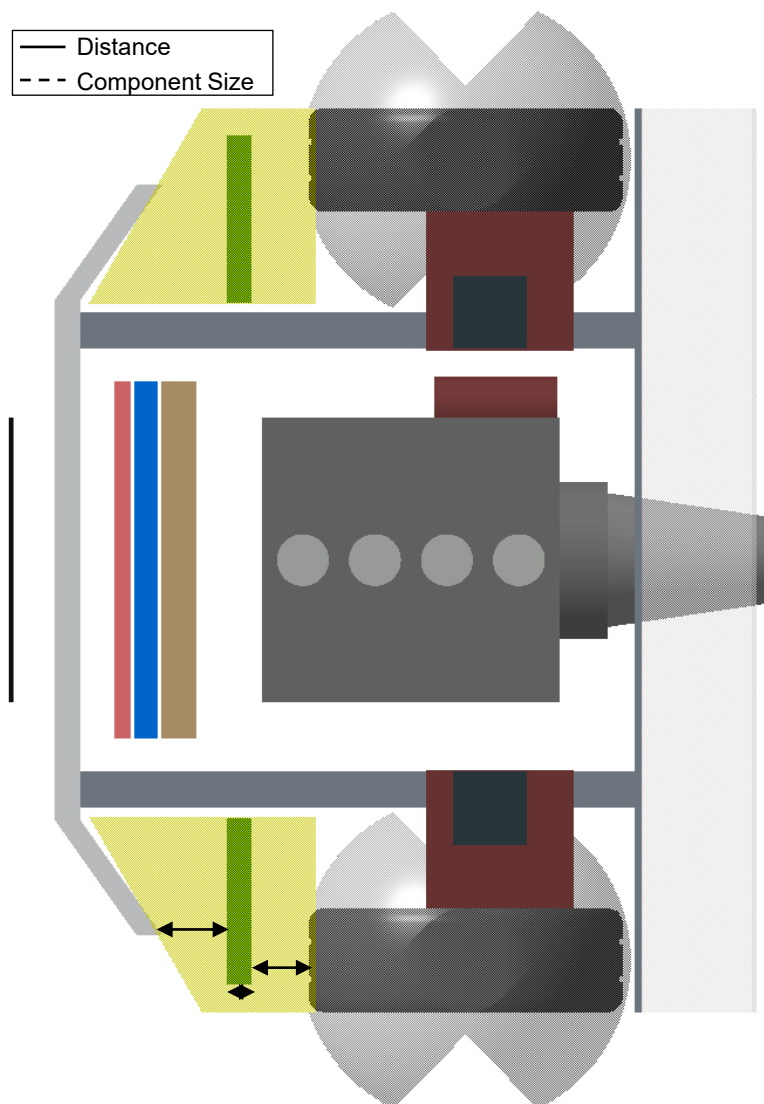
Dimensional chain over the lateral intercooler in the x-direction
